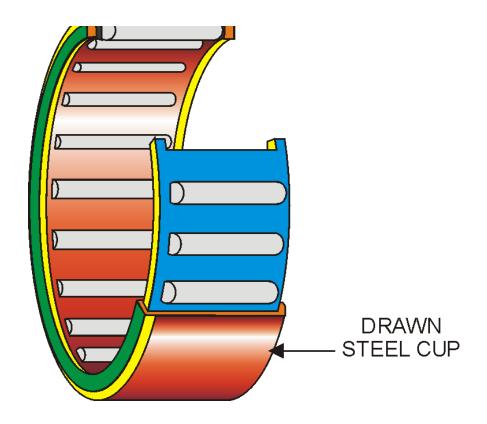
Needle bearing with drawn steel cup and no inner ring (HK type). (Courtesy SKF Canada Limited)
